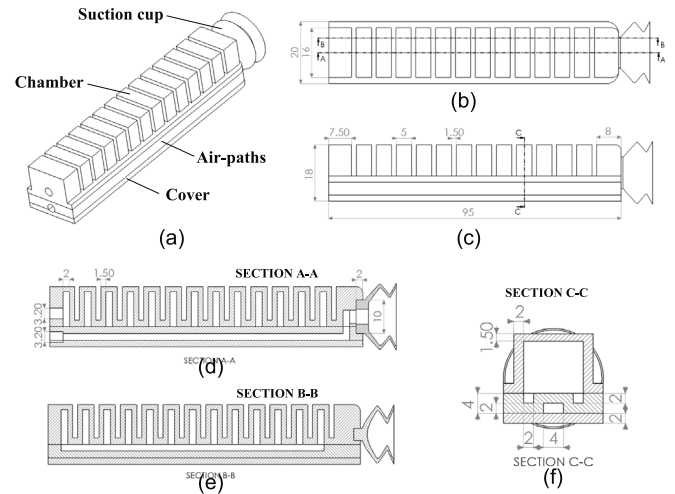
Design and dimensions of the soft finger: (a) isometric view, (b) top view, (c) side view, (d) section A-A, (e) section B-B, and (f) section C-C.
